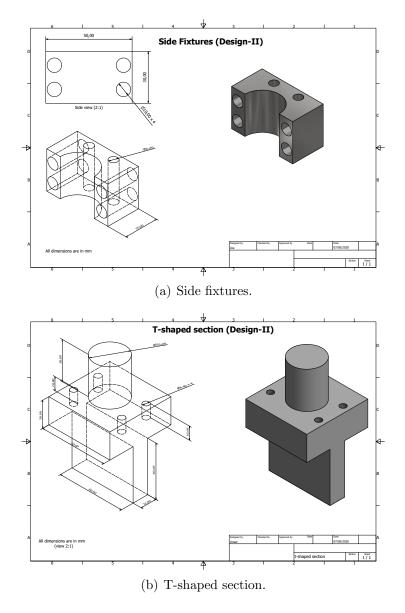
Technical drawing of the gripping fixtures used for the tensile testing of braided tubes (Design II).
